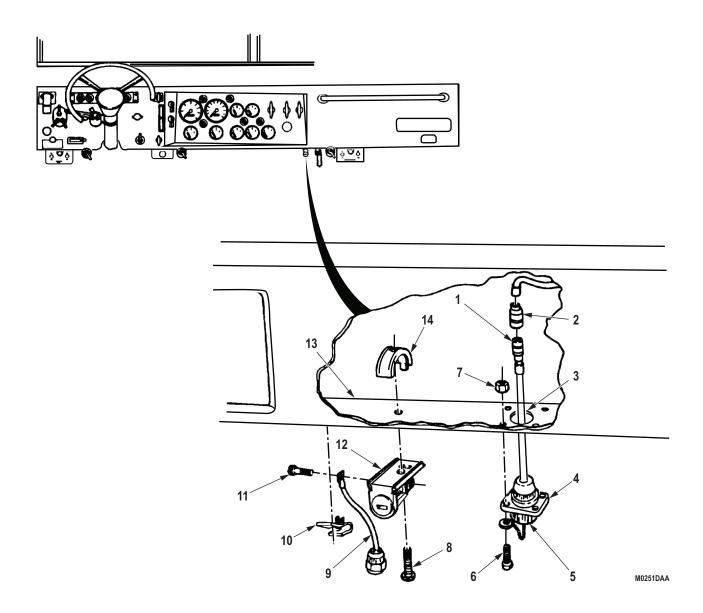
Auxiliary Outlet Socket and Receptacle Removal.
